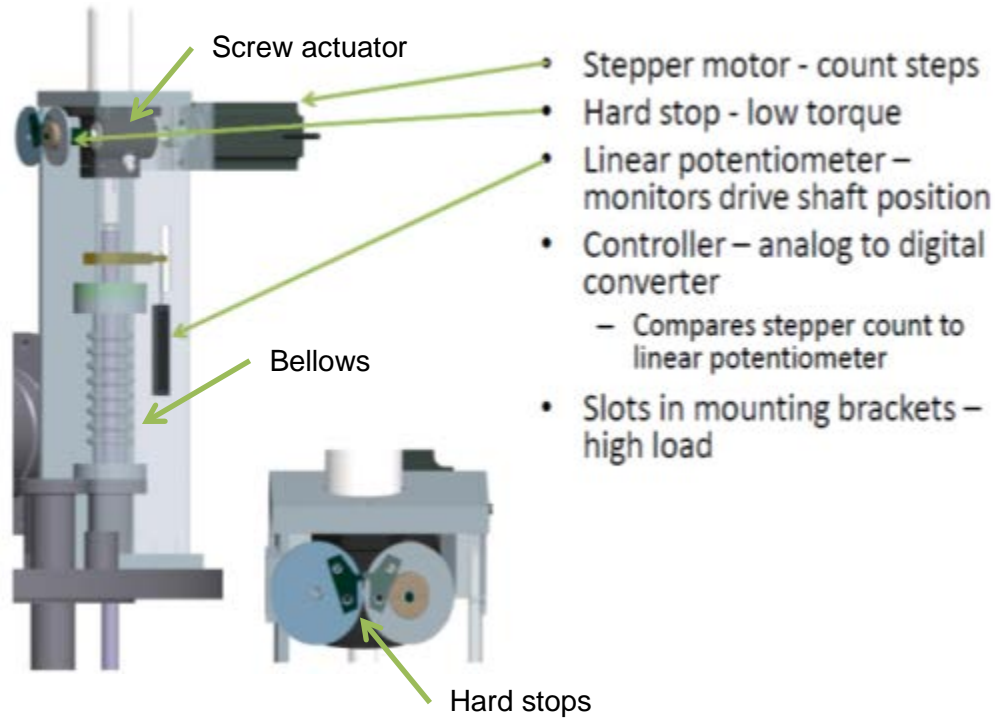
Schematic of motor and actuator assembly. The motor and actuator assembly are mounted on the top plate, outside of the cryostat.
